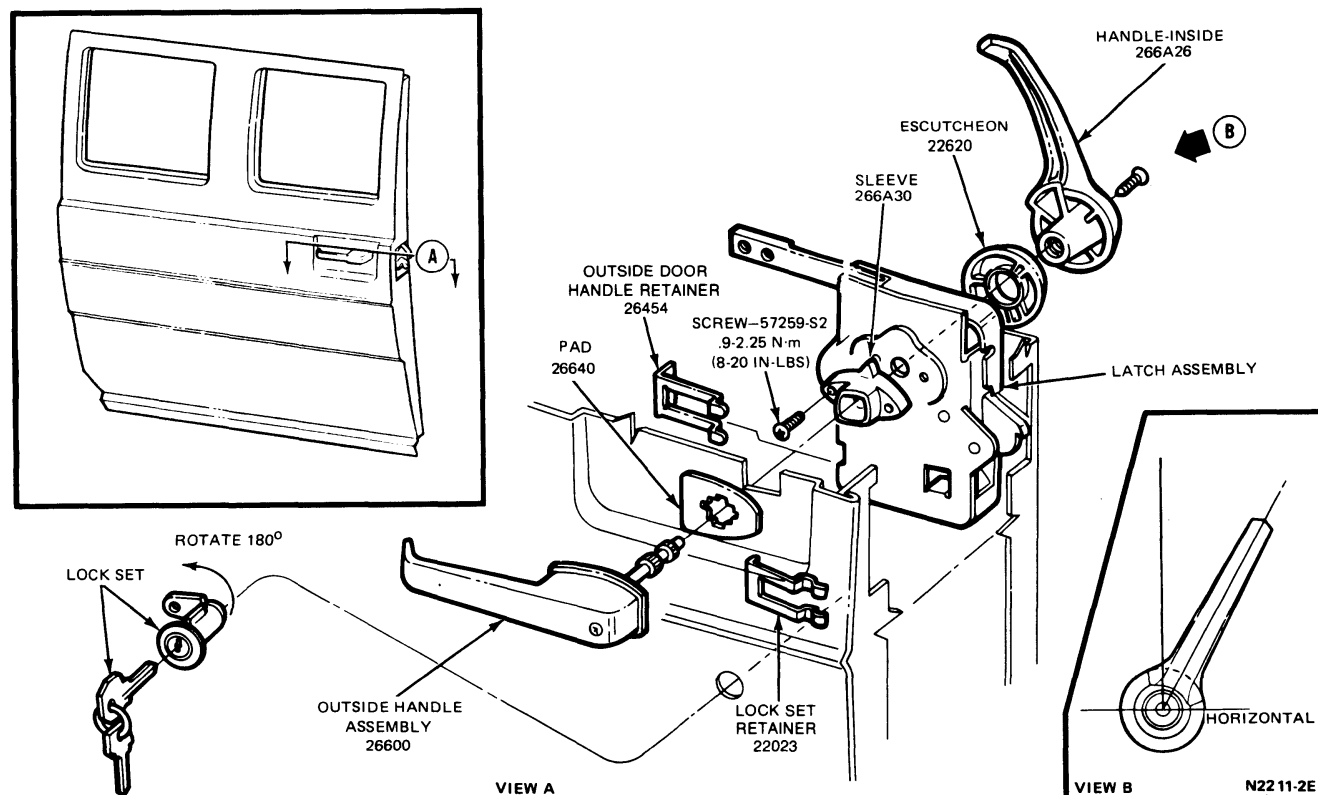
Sliding Door—Lock and Latch—E-100—E-350
